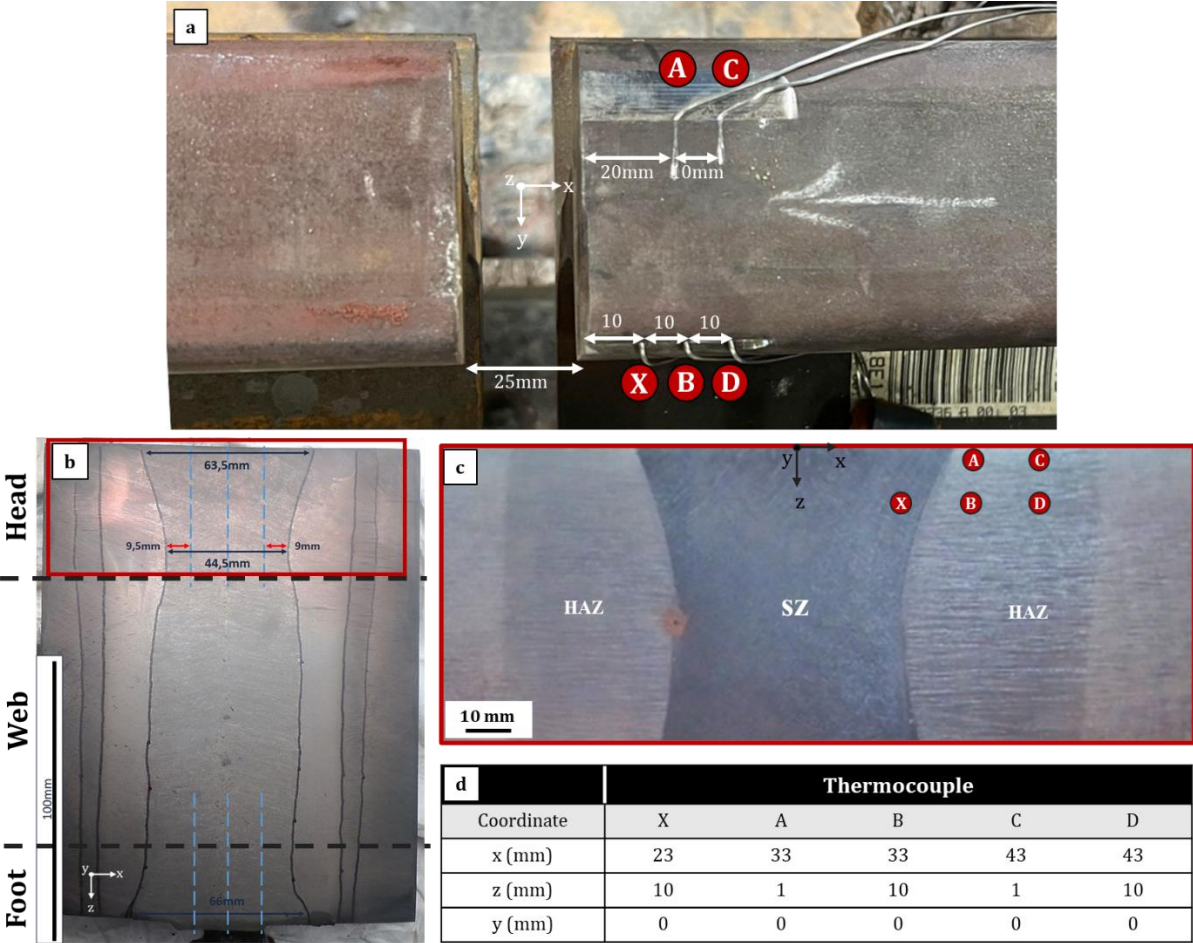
a- Welding set up with the inserted thermocouples b- Weld sample after preliminary test etched to reveal the dimensions and shape of the weld seam. c- close up of the etched rail head resulting from the second welding process. The position of the four thermocouples studied (named A to D) is represented on this figure. Thermocouple X melted and its data is therefore not presented. d- synthesis of the coordinates of each four thermocouples.
